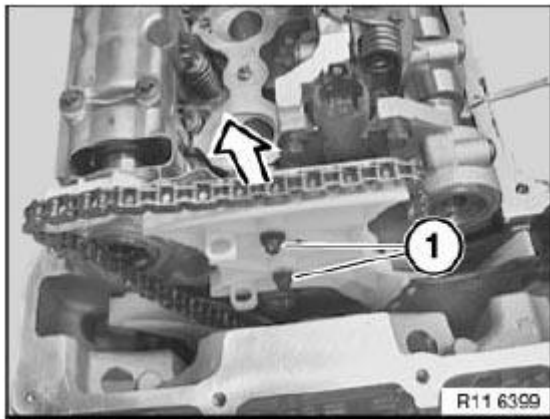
Removing Chain Module With Timing Chain And Sprocket Wheel Upwards
